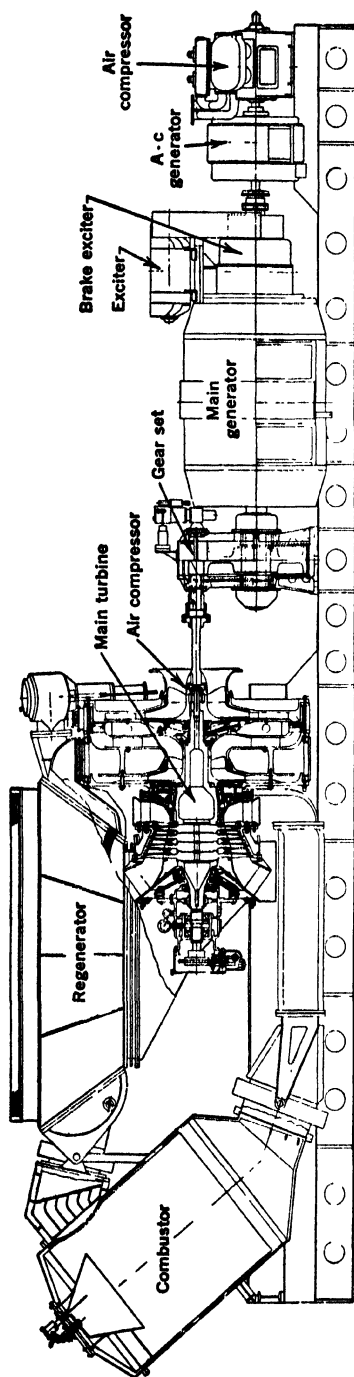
Oil-burning gas turbine locomotive power plant. (Courtesy of The Elliott Co.)
